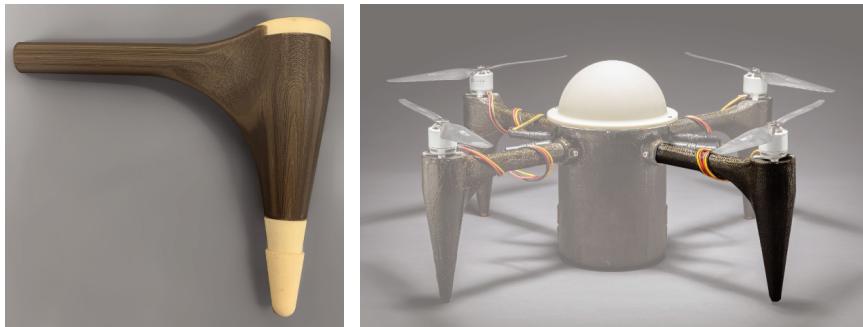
Mold and finished product for the CRACUNS aircraft. Left, Additively manufactured layup mold using soluble support material (brown) and glass-filled nylon inserts (cream color). Right, Assembled CRACUNS aircraft showing the composite leg assemblies.
